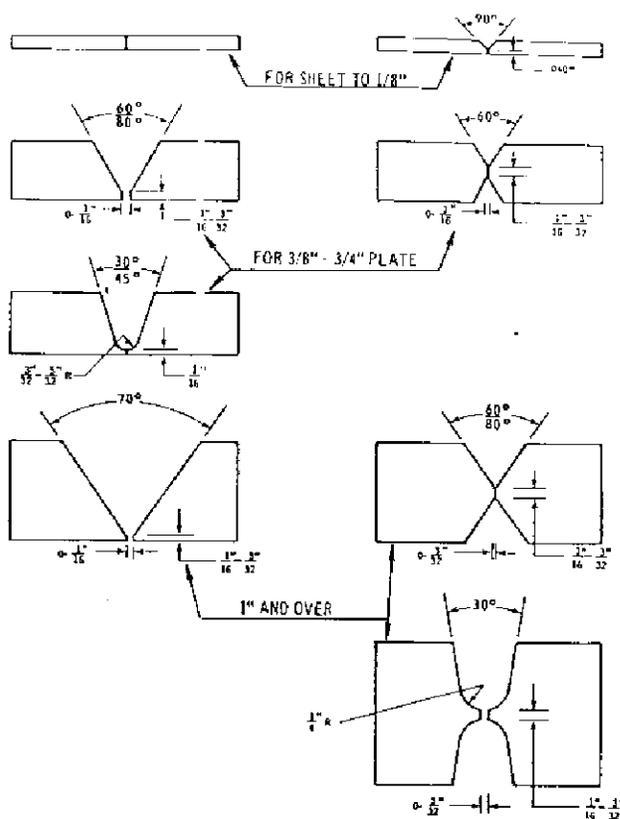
Some typical joint designs for welding maraging steel
